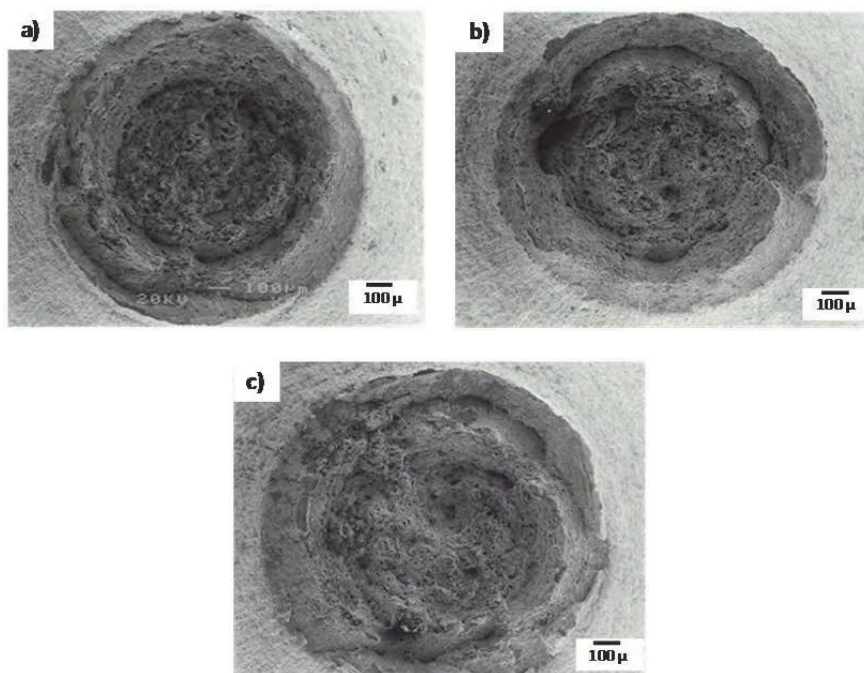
Fracture surfaces after made the SSRT, a) in air, b) NS4 solution with pH 3 and c) NS4 solution with pH-10.
